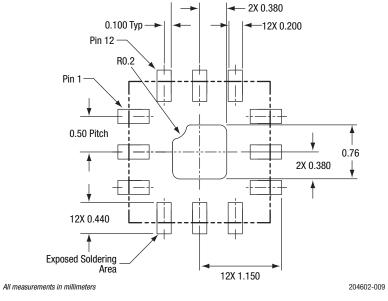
SKYA21062 PCB Layout Footprint (Top View)
